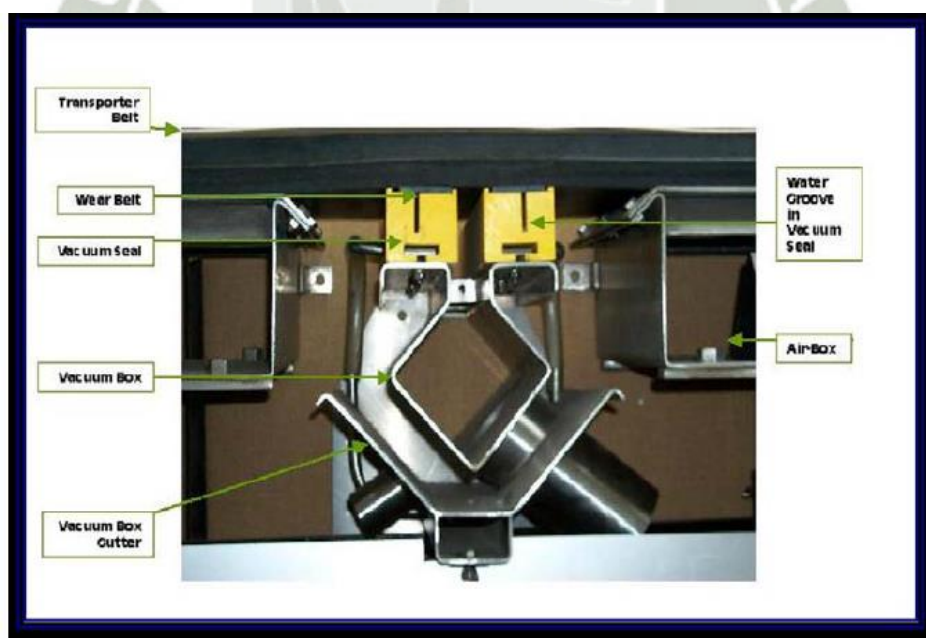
Cross-section of belt filter - Vacuum Box & Wear Belt
